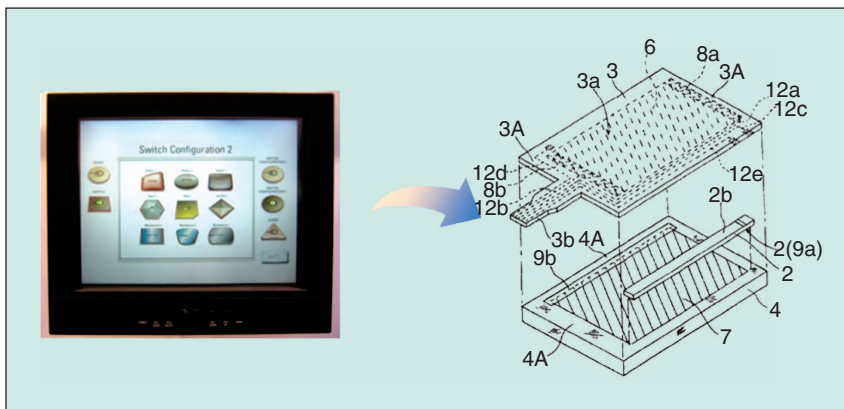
Disassembled haptic touch panel with piezoactuator inside. (Developed by SMK.)
